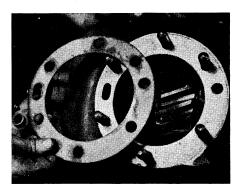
Line up oil passage holes in carrier housing, gasket, shim pack and pinion bearing cage
